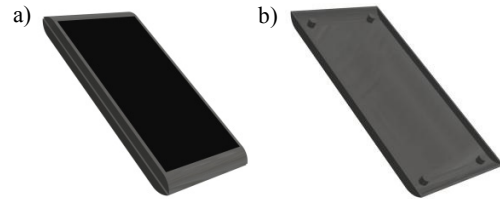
(a) Assembled mobile phone case, (b) back part of case
